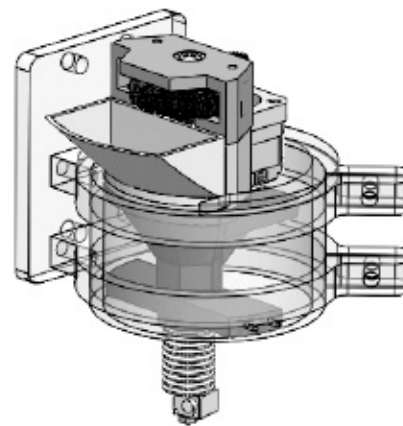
Complete Assembly Figure 2: Prototype Assembled
